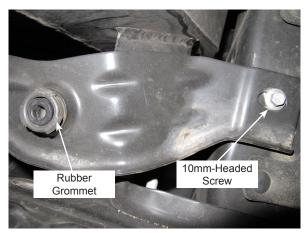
h (Upper cooler support bracket. D. Side shown)
